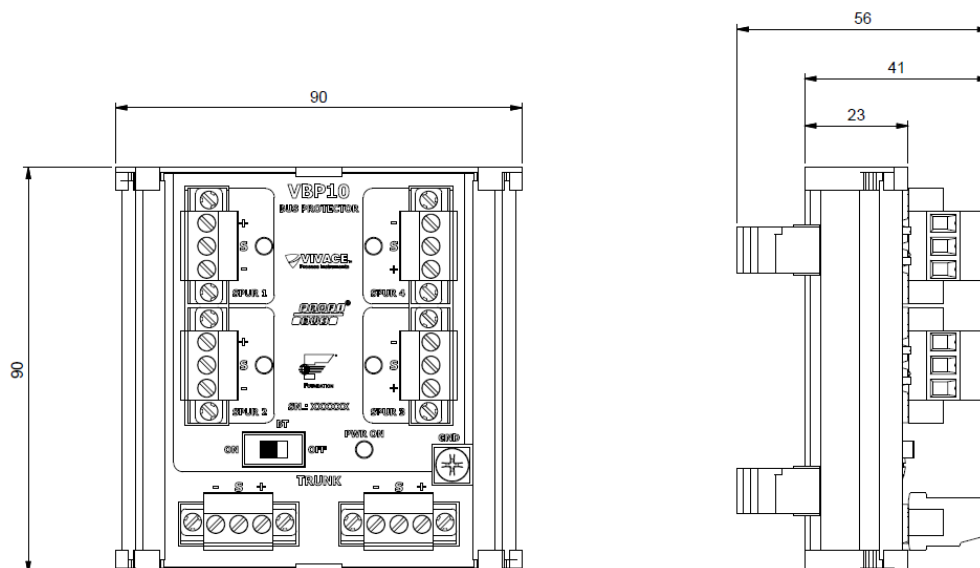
Dimensional drawing for VBP10, 4-channel model.
